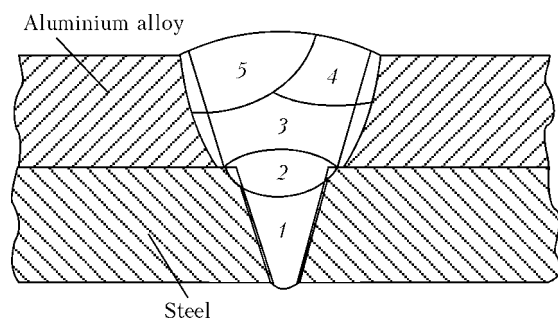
Scheme of filling the groove being welded of bimetallic butt joint: 1, 2 and 3–5 — passes in making, respectively, steel and aluminium weld
